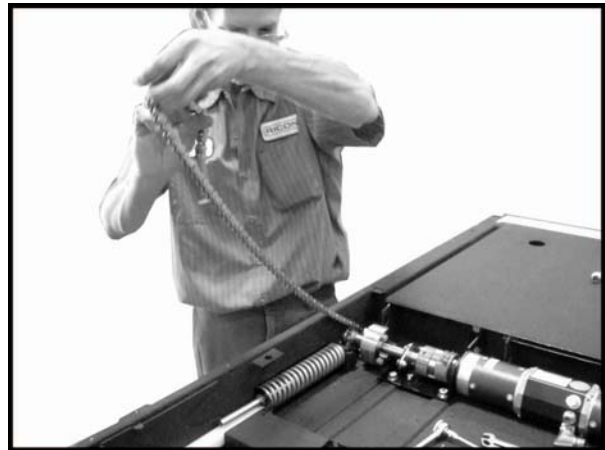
and 2-8: ROUTE CHAIN SPRING (LH SIDE SHOWN)
